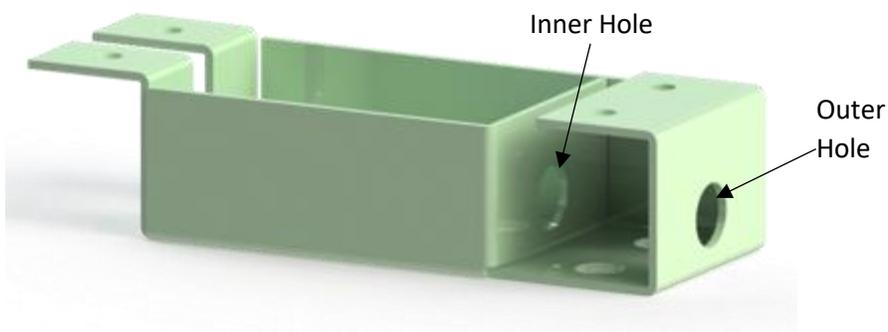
Location of two holes labeled as Inner Hole and Outer Hole, which the solenoid pin passes through
